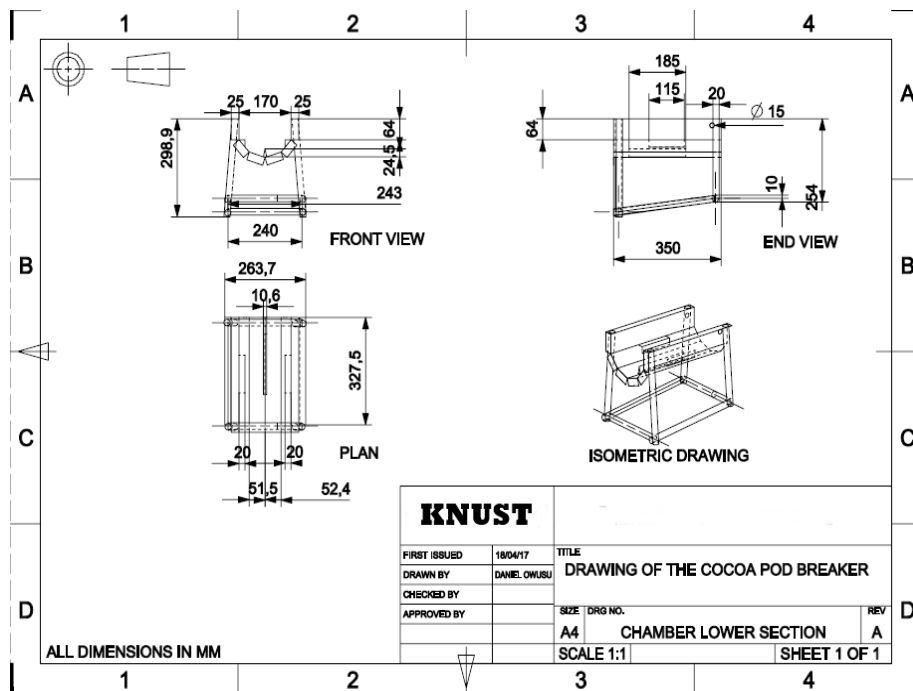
Engineering drawing of lower section of the cocoa pod splitter
